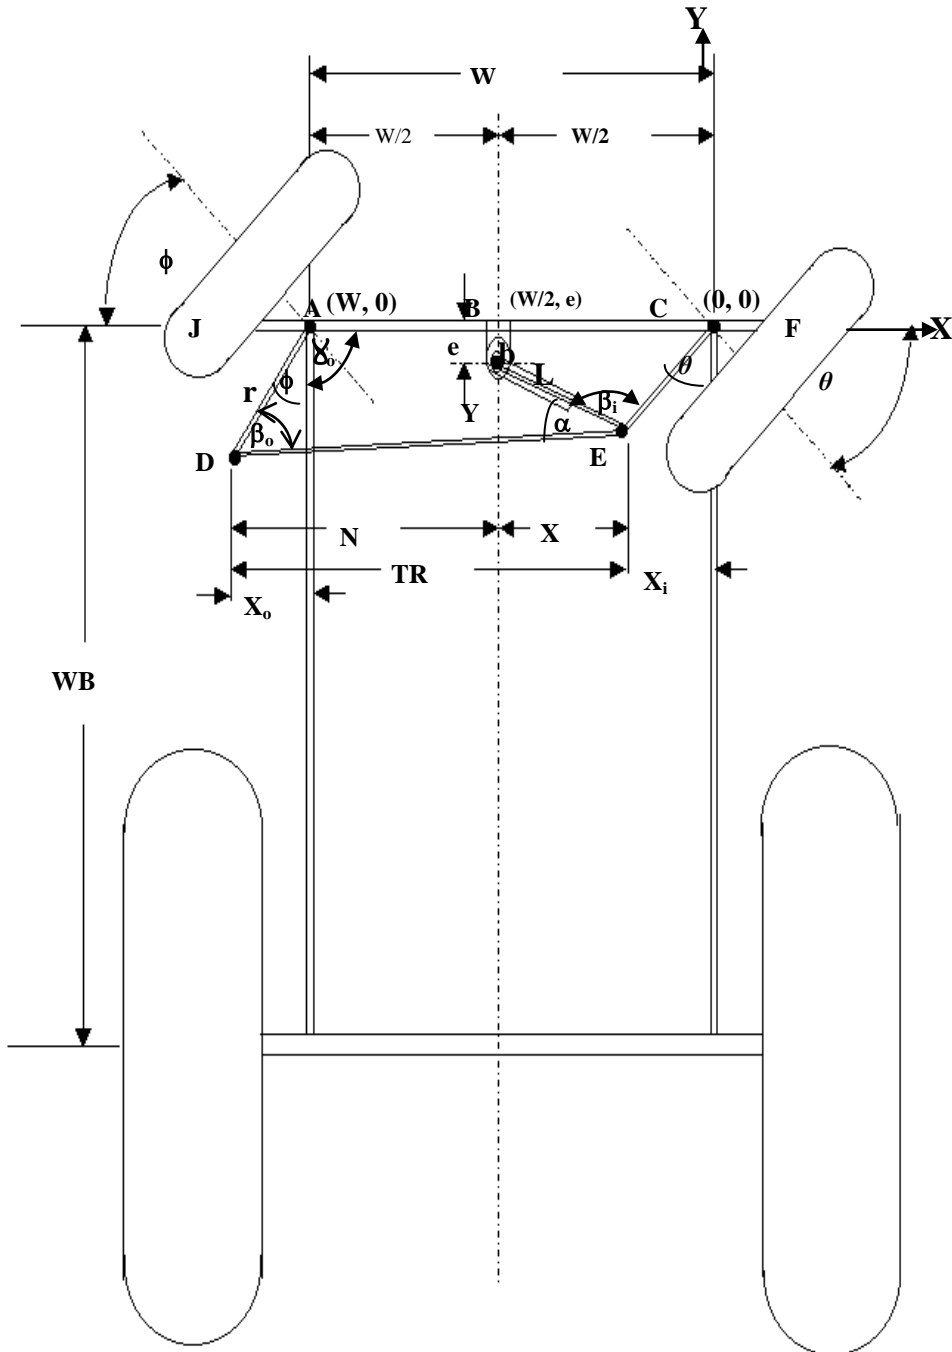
Steering geometry during a turn of the tractor to the right direction and dimensions of the mechanism (θ : inner; ϕ : outer steering angles).
